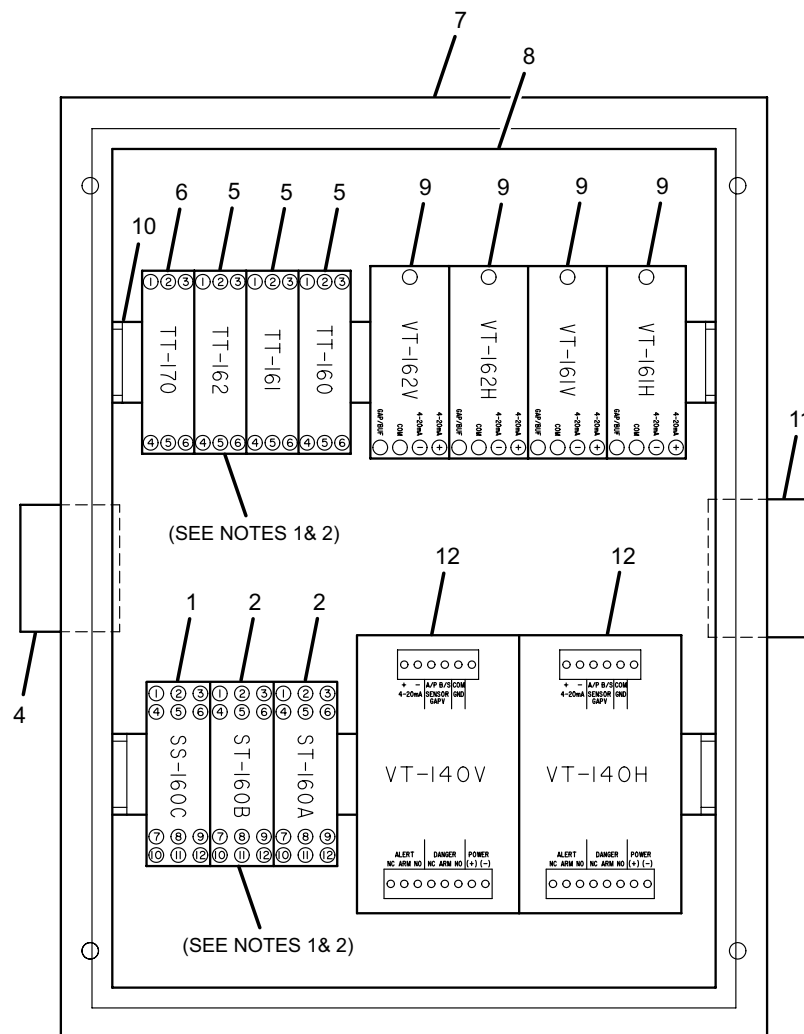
INSIDE OF TURBINE BOX W/ OPTIONAL TURBINE AND COMPRESSOR VIBRATION TRANSMITTERS
